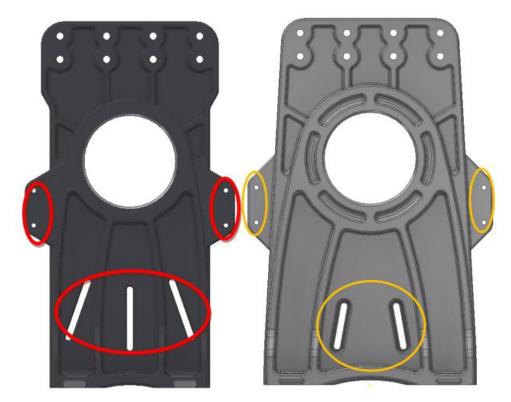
Outboard Stand Mounting Locations GT11 (left) and GT31 (right)
